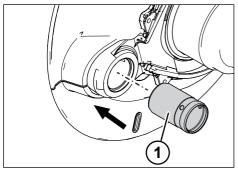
Inserting the brake carrier cam bearing bushing
